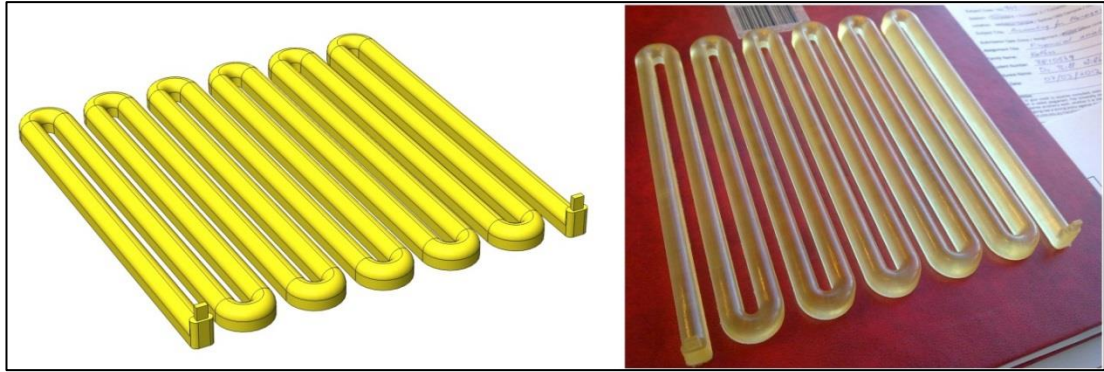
Serpentine part CAD model (left) and 3D printed part (right).
